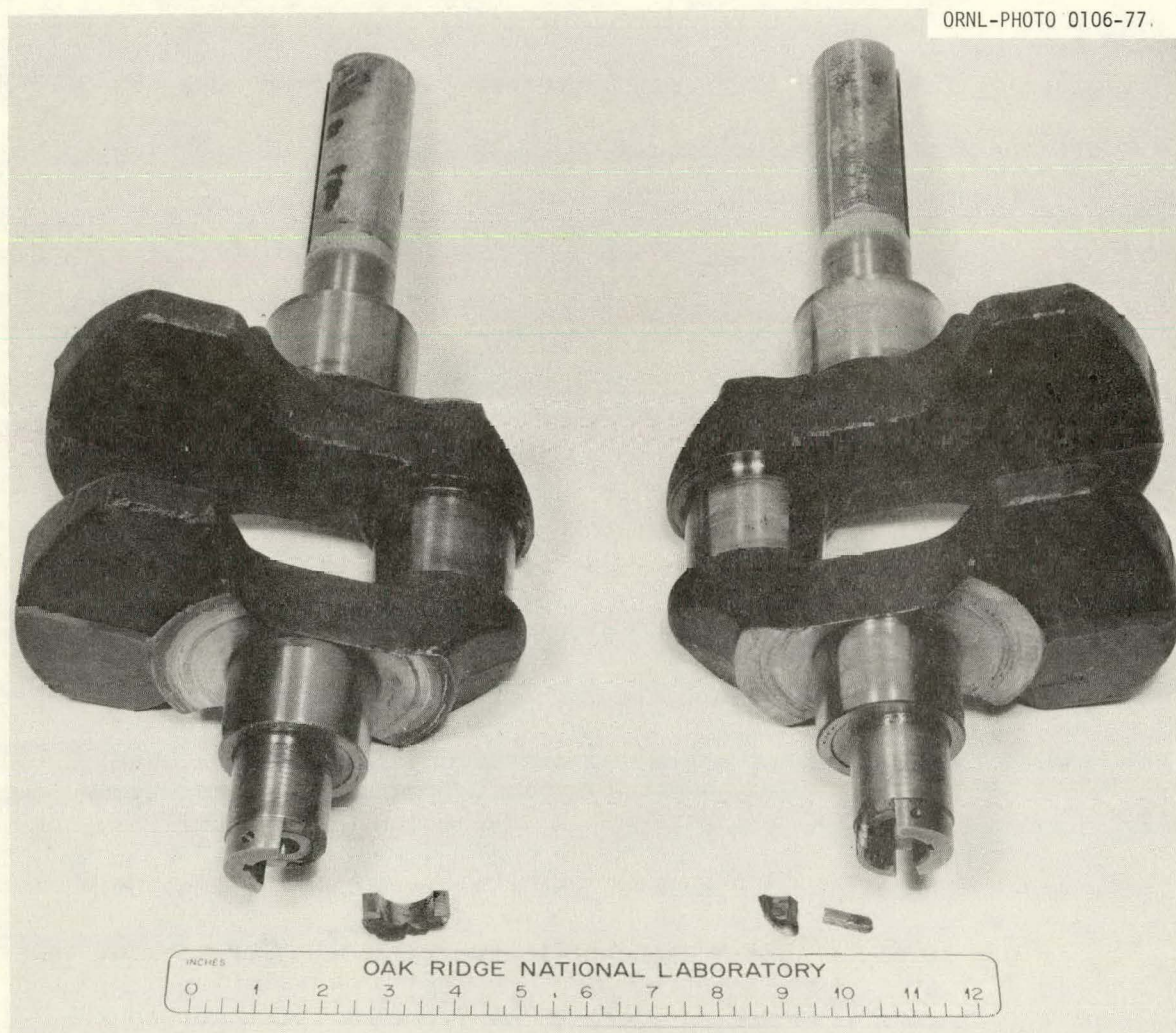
Main and auxiliary (left to right) crankshafts showing the failed couplings.
